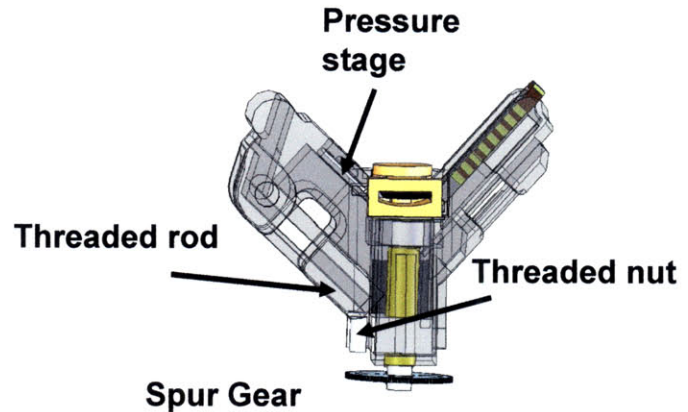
Side view of the motorized ring sensor illustrating the travel available to the threaded nut and pressure stage as the motor is activated.
